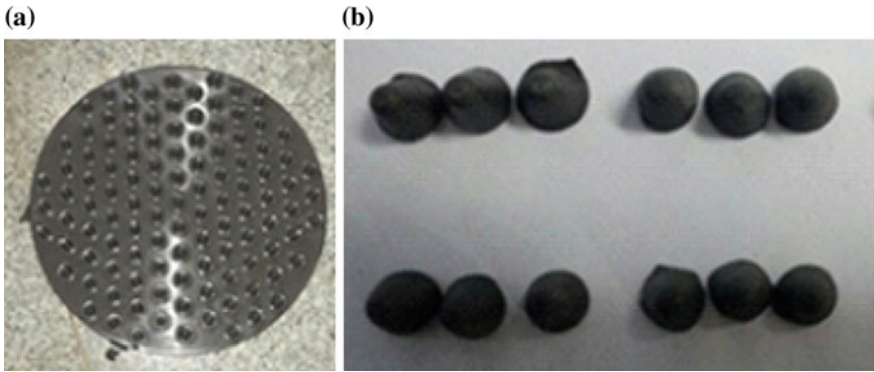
Photographs of the mold and molded resin abrasive blocks. a Mold; b molded resin abrasive blocks
